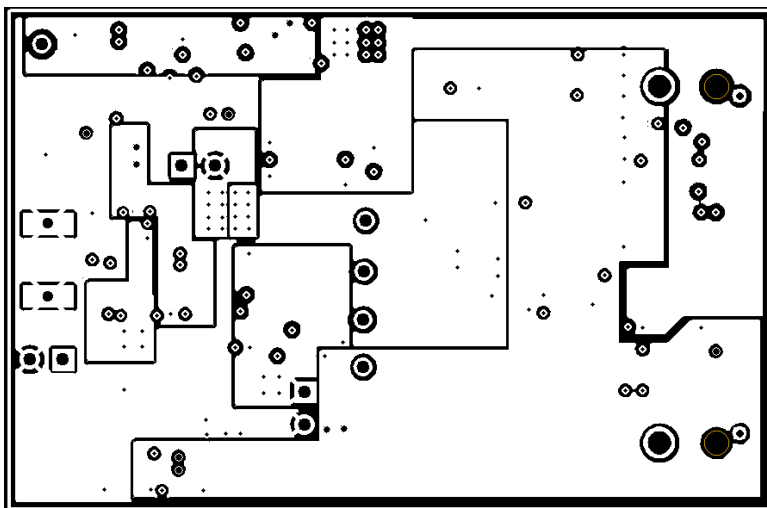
ADS7041EVM PCB: Power Layer (L3)
